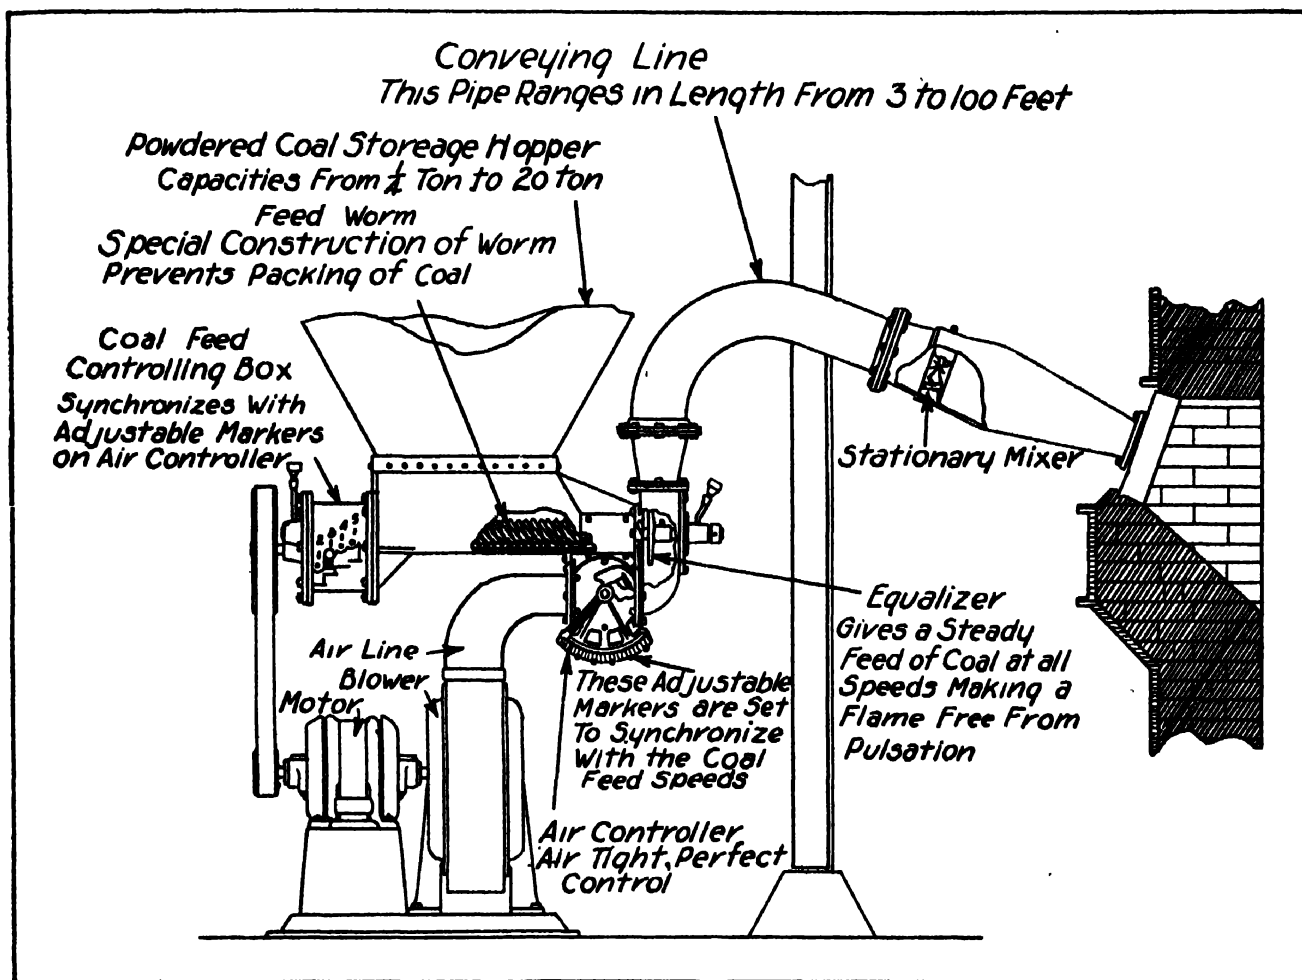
DETAILS OF A POWDERED-COAL BURNING SYSTEM, SIMILAR TO THAT INSTALLED AT THE CHICAGO PLANT OF THE NATIONAL MALLEABLE CASTINGS CO.
